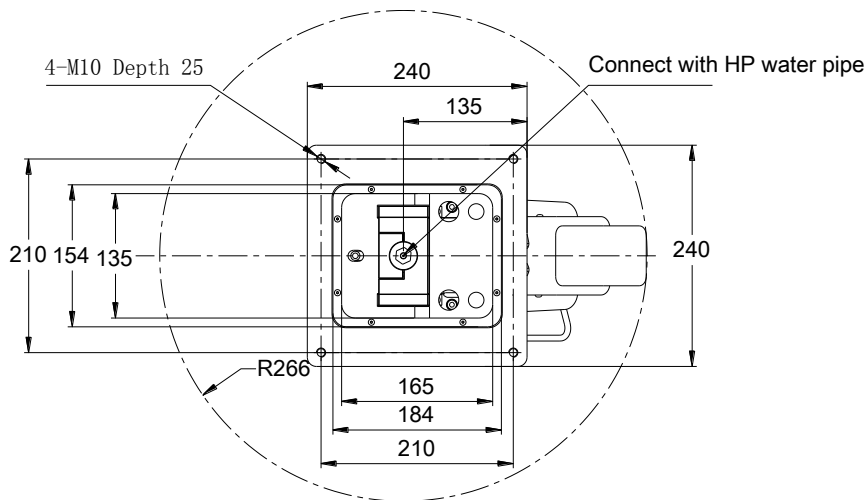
Dimensional drawing of WJAC-70-xxxx-03 (Cross-section view)
